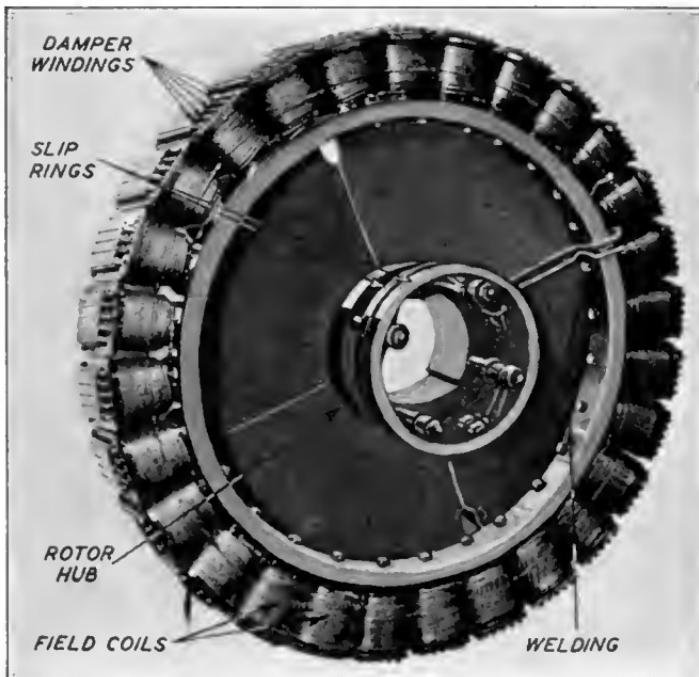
A Large Rotor with Damper Windings and Pole Pieces Bolted to Rotor
